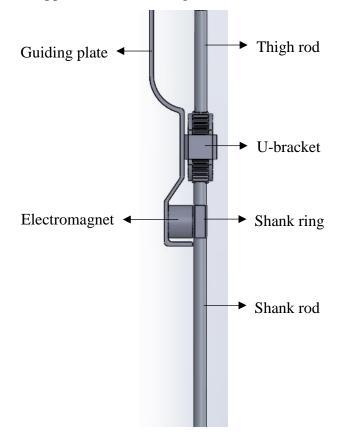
Final design of gear-based knee joint prosthesis with the integration of locking mechanism.
